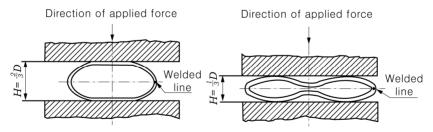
Flattening test of electric-resistance welded steel pipes Grade 1
